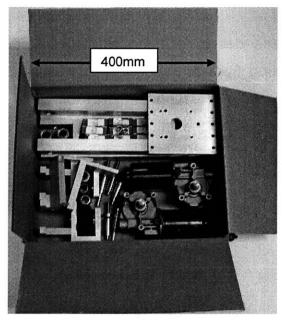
Mechanical parts fit a $(40x30x13 \ cm^3)$ box
